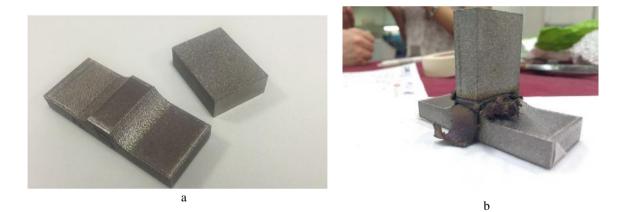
(a) specimen before welding; (b) after welding.
